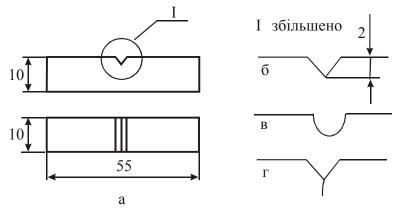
The shape and size of samples to test for impact bending (a) V-like concentrator (b), U-like concentrator (c) and concentrator, which ends a crack (d).
